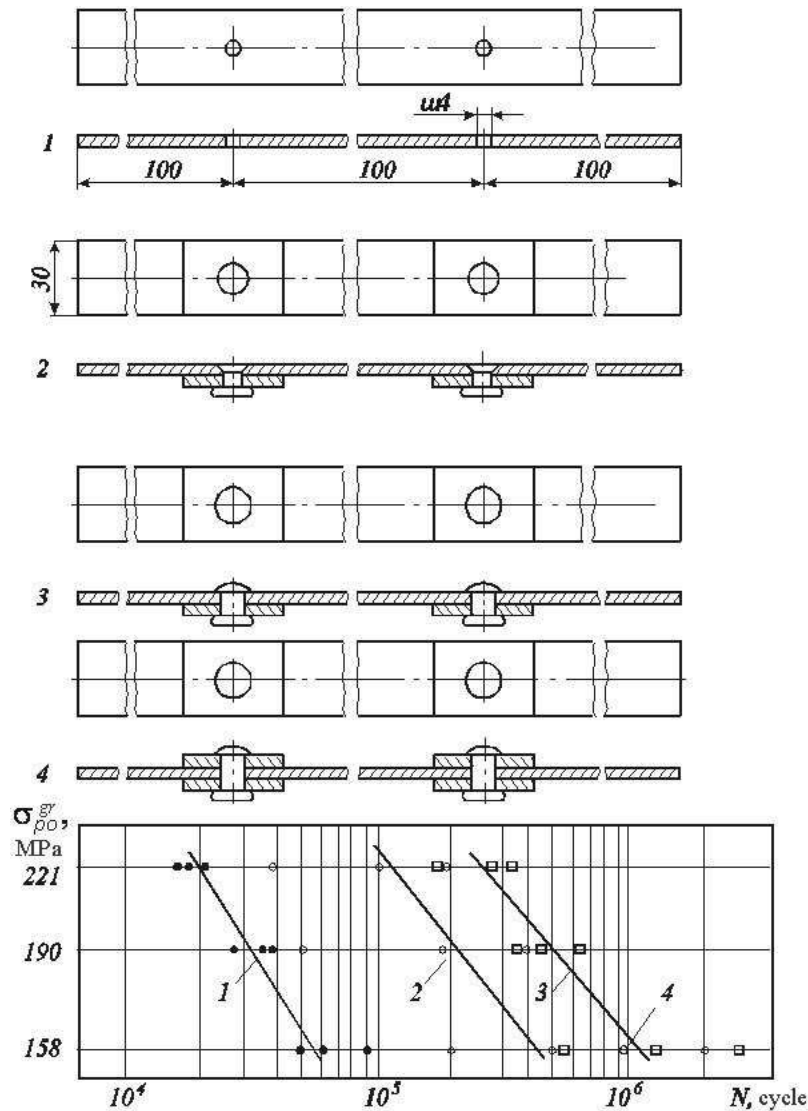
Test-pieces for fatigue tests and their fatigue test results: 1 – free unloaded hole; 2 – hole filled with rivet OCT1 34052-85; 3,4 – hole filled with rivet OCT1 34040-79
